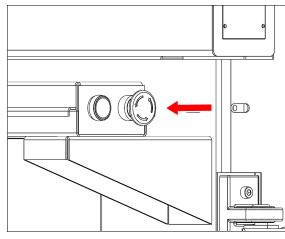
Example of the Emergency Stop button locked in the disabled position.
